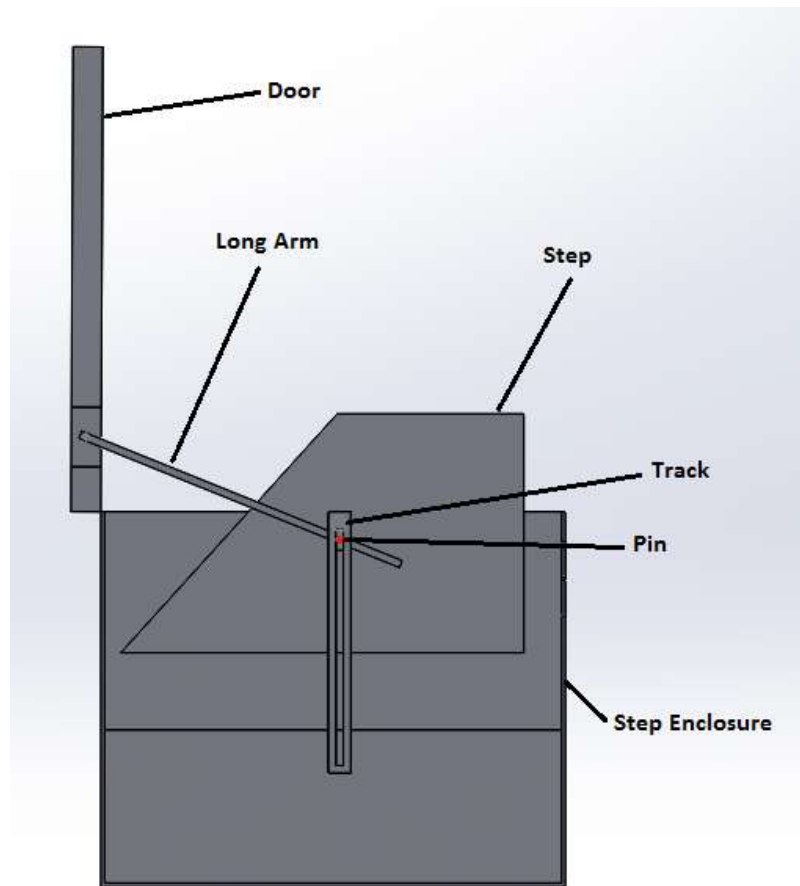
Bottom view for mechanical linkage with long arm (step at extended position)
